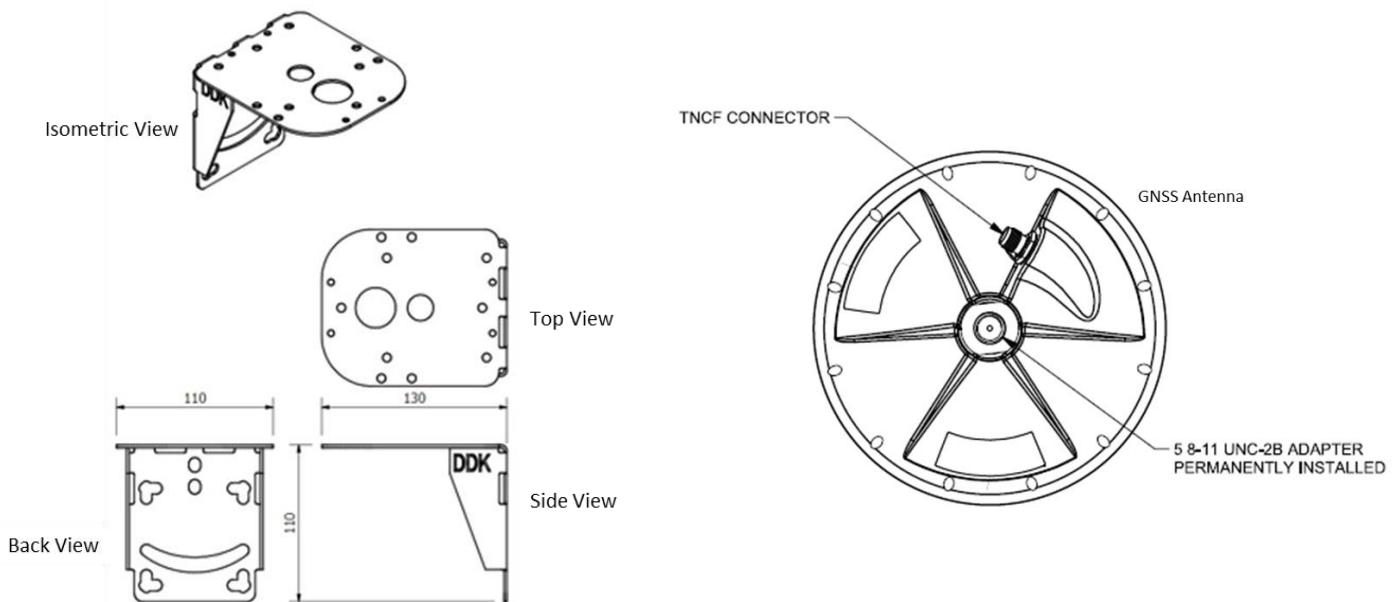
Universal Mounting Bracket and C-Nav289 GNSS Antenna
